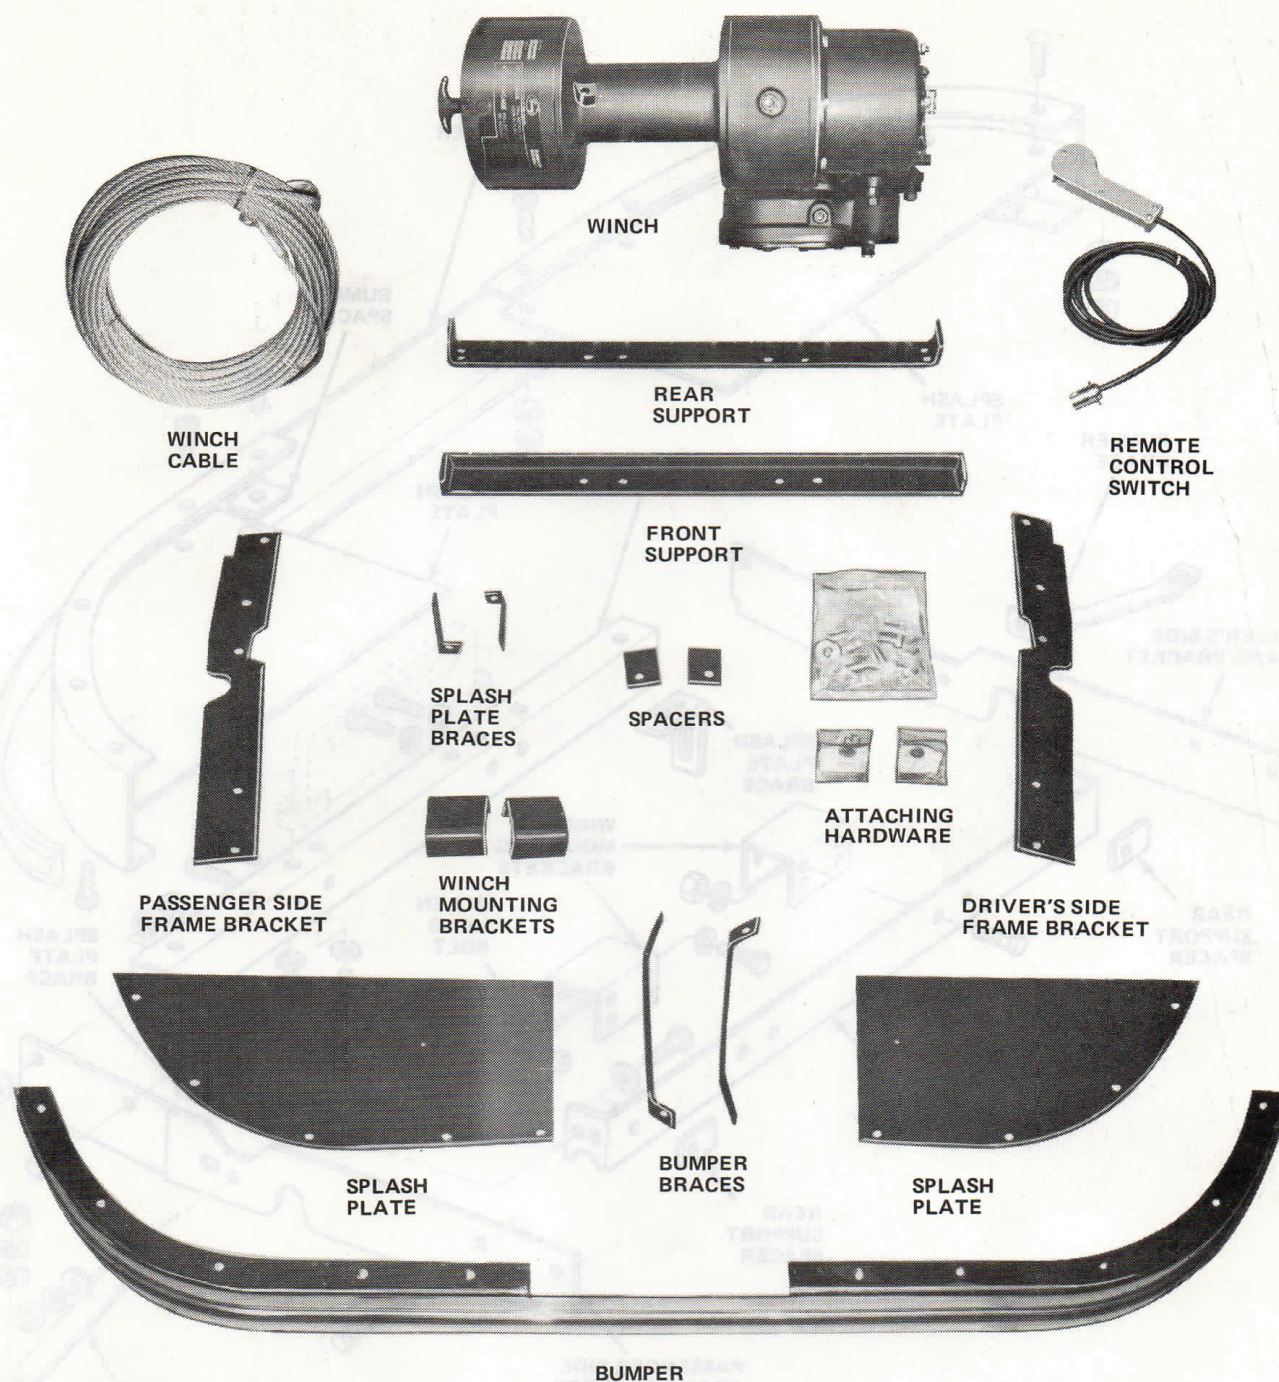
Ramsey Winch Kit with Bumper—1976-79 Cherokee-Wagoneer-Truck
